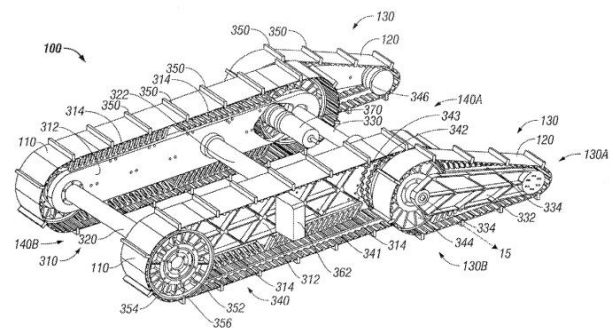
The main body schematic drawing of "Engineer" crawler robot. Courtesy of Servosila company.
